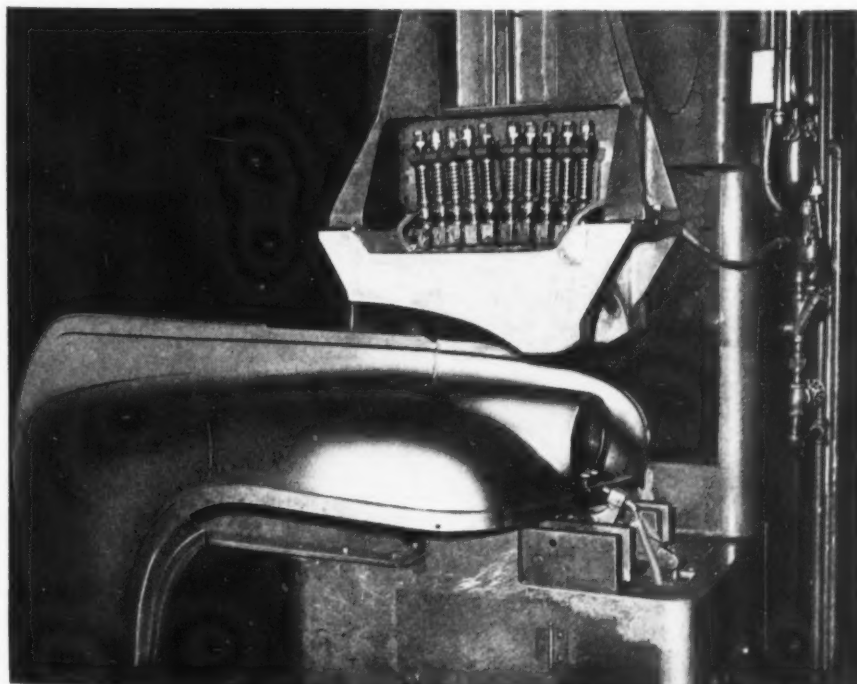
Spot-welding Operation in which Eleven Electrodes are Simultaneously Applied on Fender Stampings
